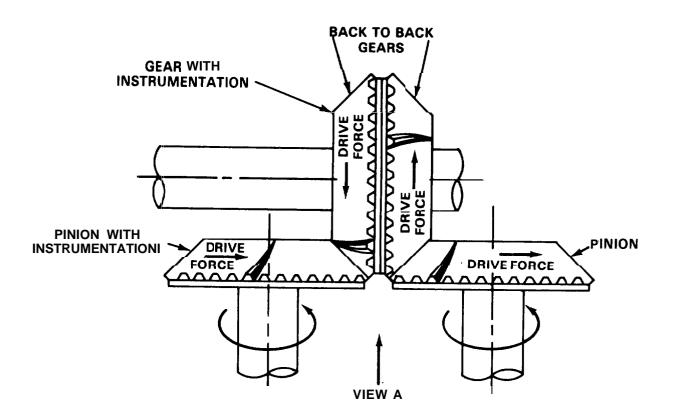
Bevel Gear Static Load - Plainview Condition<sup>4</sup>
